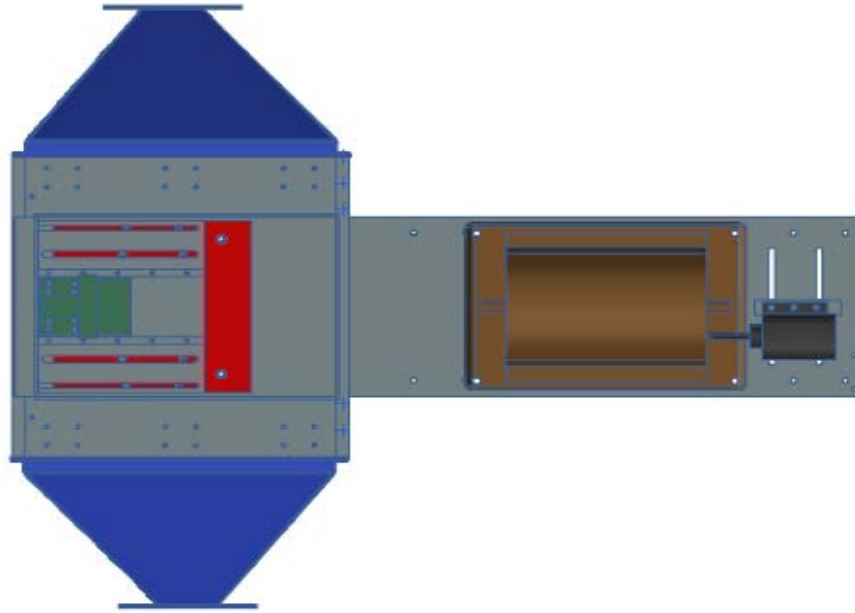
Top view of CAD model showing dynamometer, starter motor, base plate, motor mount, motor mount adjustment plate, entrance diffuser, and exit nozzle.
